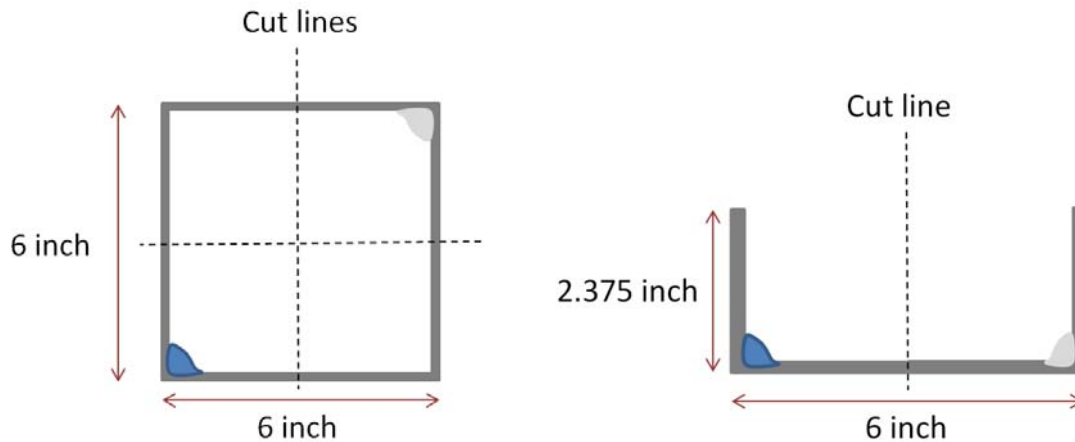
Schematic drawings of the new EBS tubing and U-channel samples showing the cut lines and additional welds for making the corrosion coupons for the new L Basin furniture rack assembly (blue – vendor weld, gray site weld)
